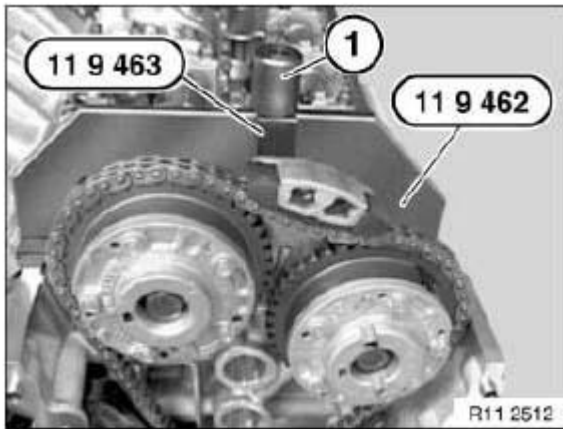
Identifying Special Tool (11 9 463) And (11 9 462)
